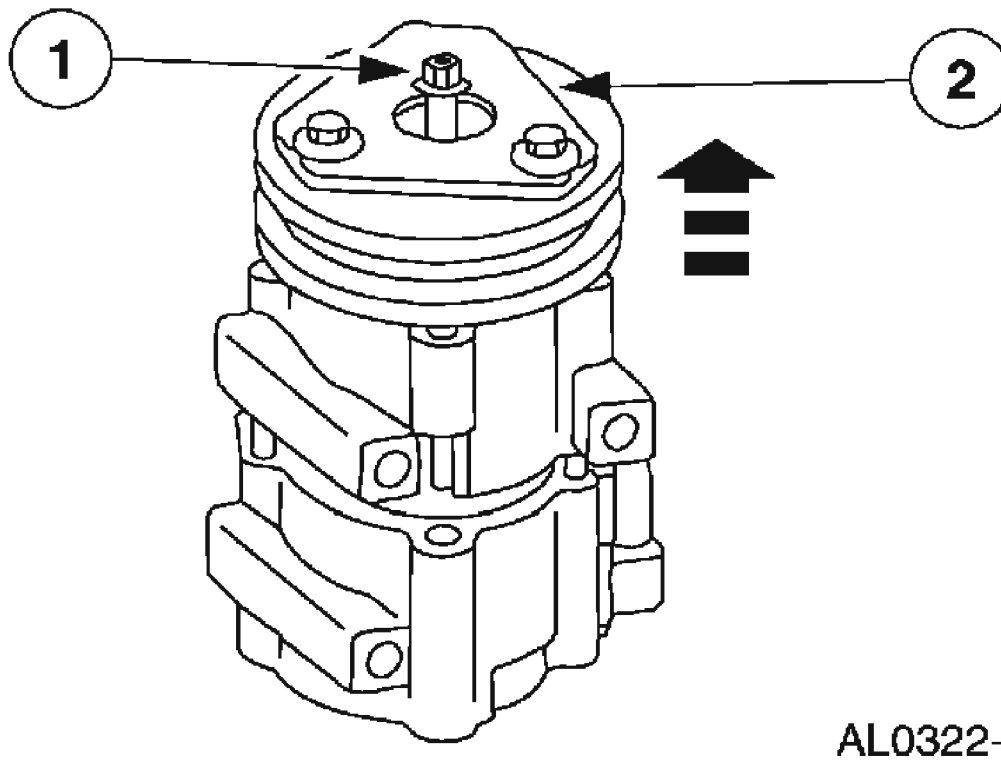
Using Special Tool To Hold A/C Disc And Hub Assembly
